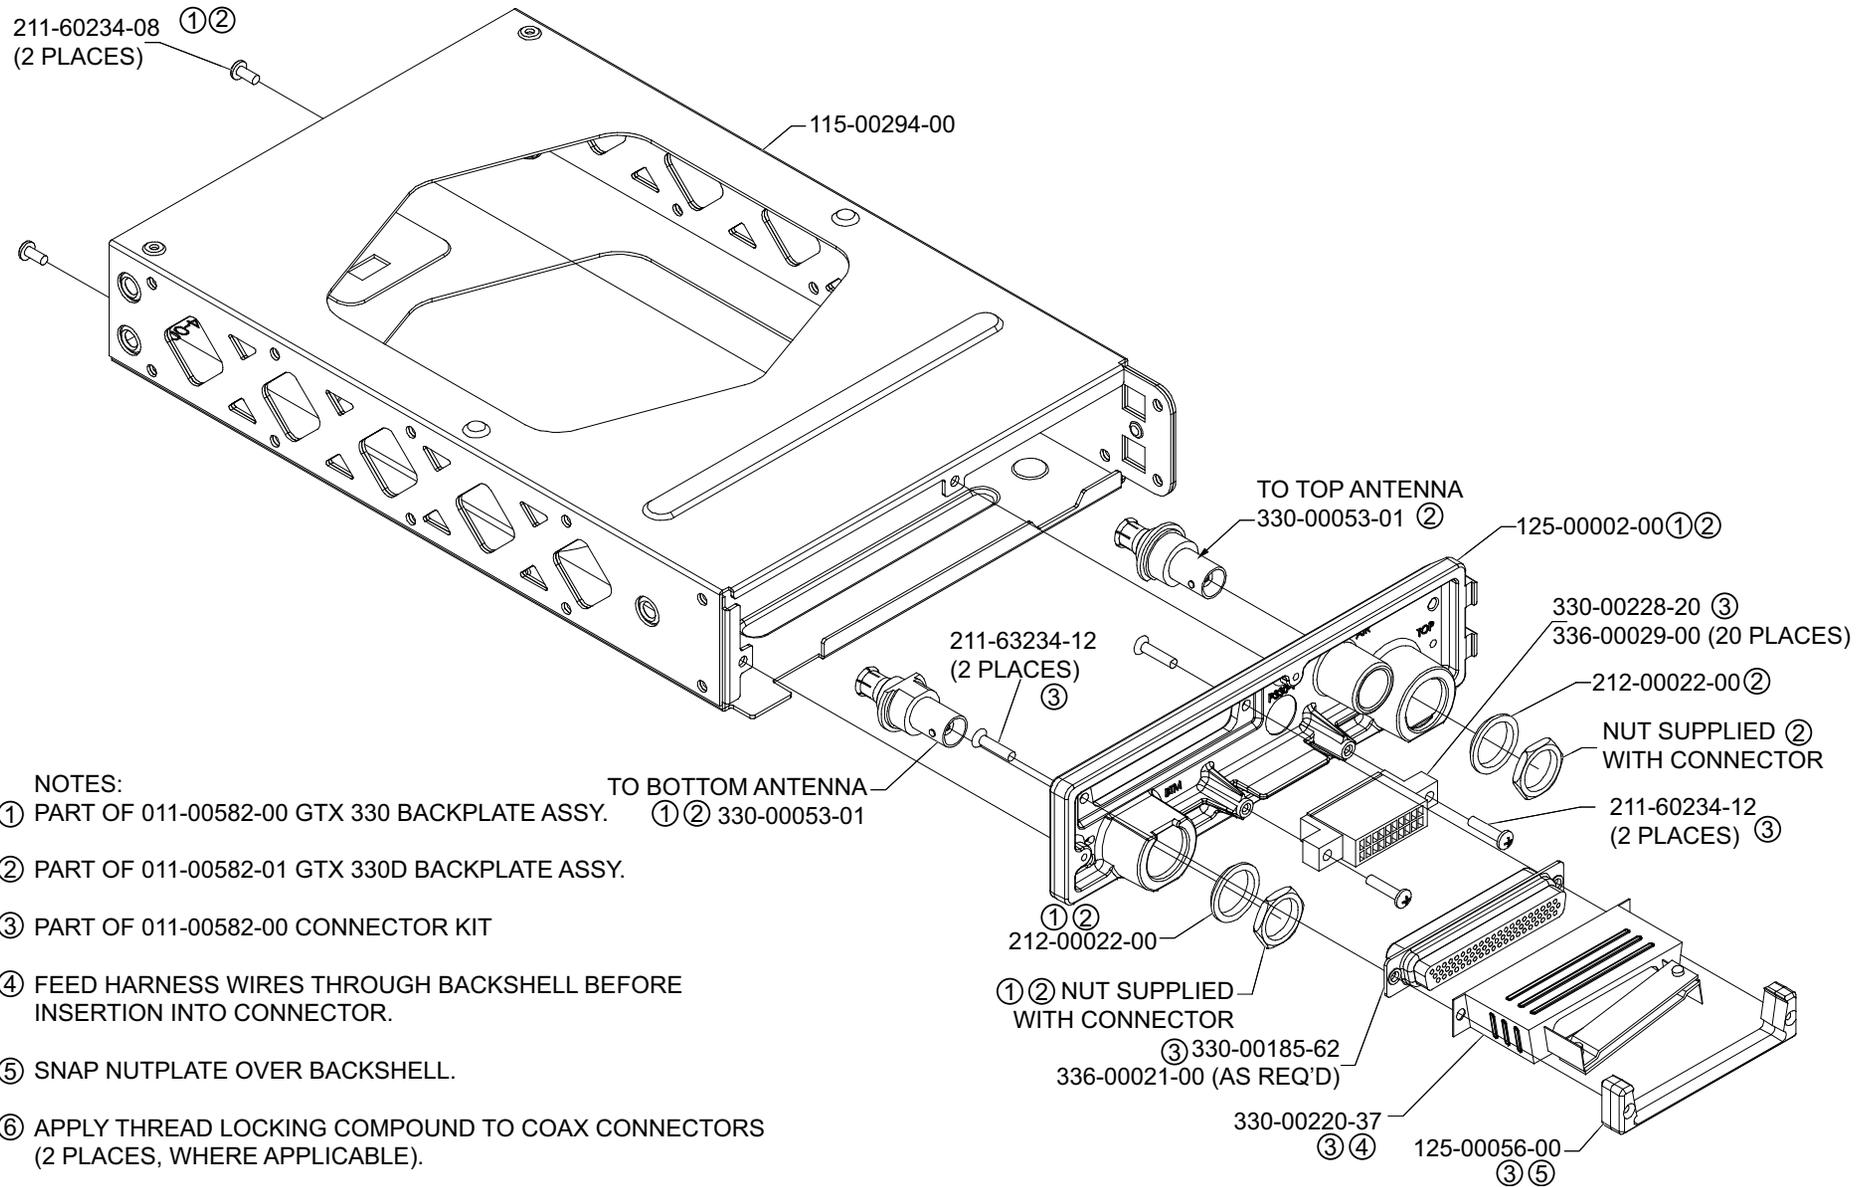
GTX 330 Mounting Rack Assembly Overview
